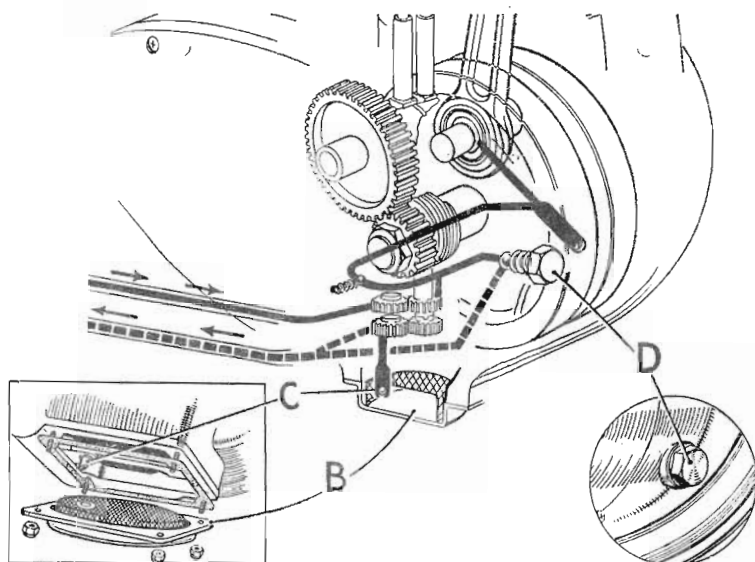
The engine lubrication system, showing the ball valve and filter.
